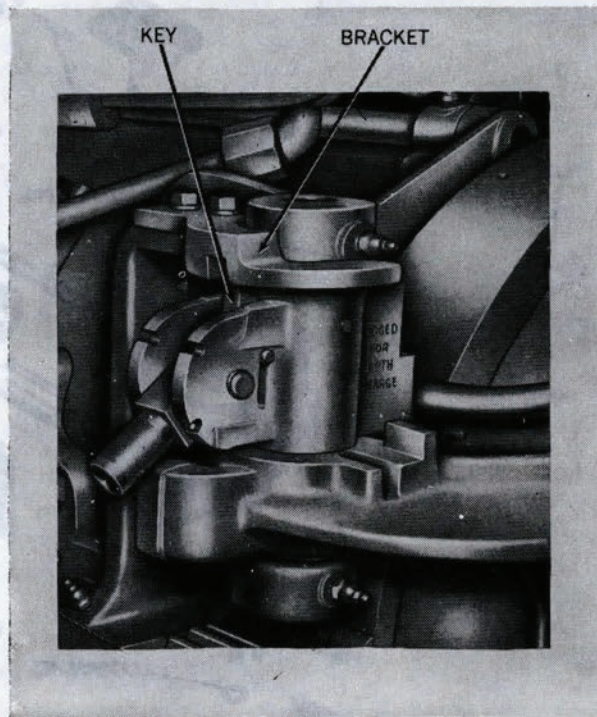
Tripping Latch Cam—NORMAL OPERATING POSITION.
